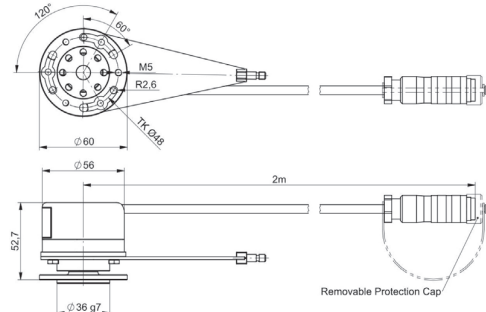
Dimensions of Crank Angle Encoder Type 2614C11
